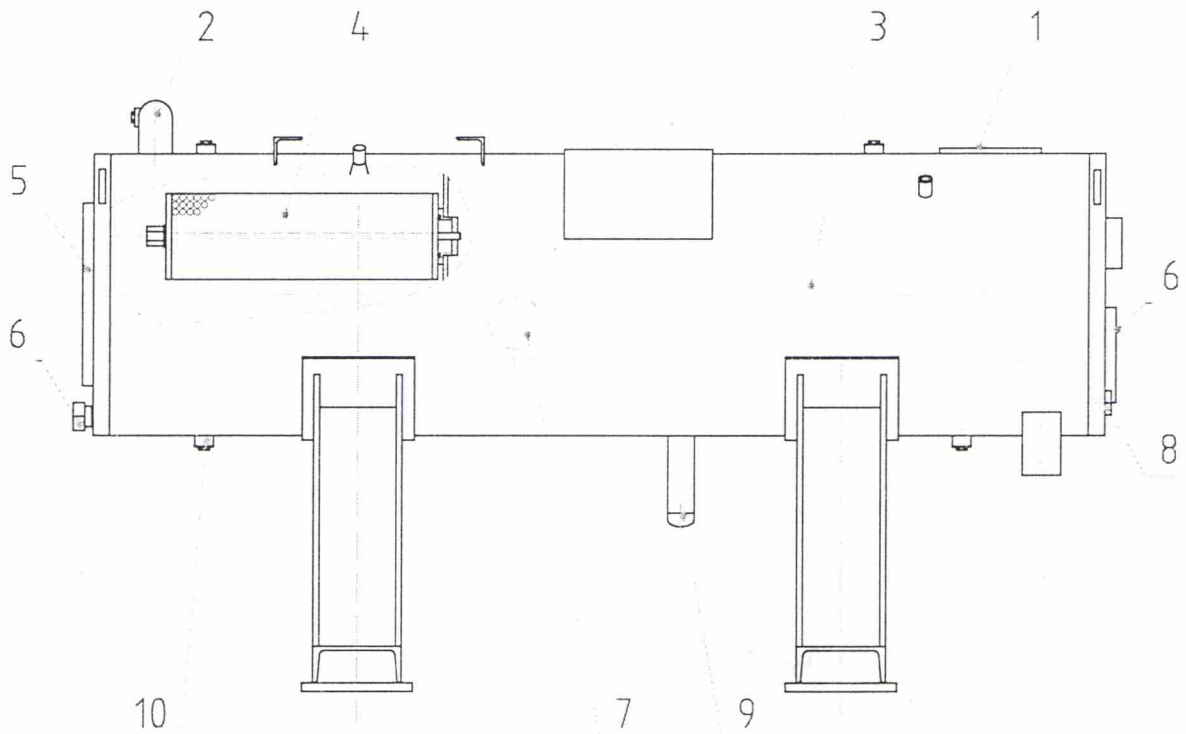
Horizontal oil separator for screw compressor packages SMALL Series
